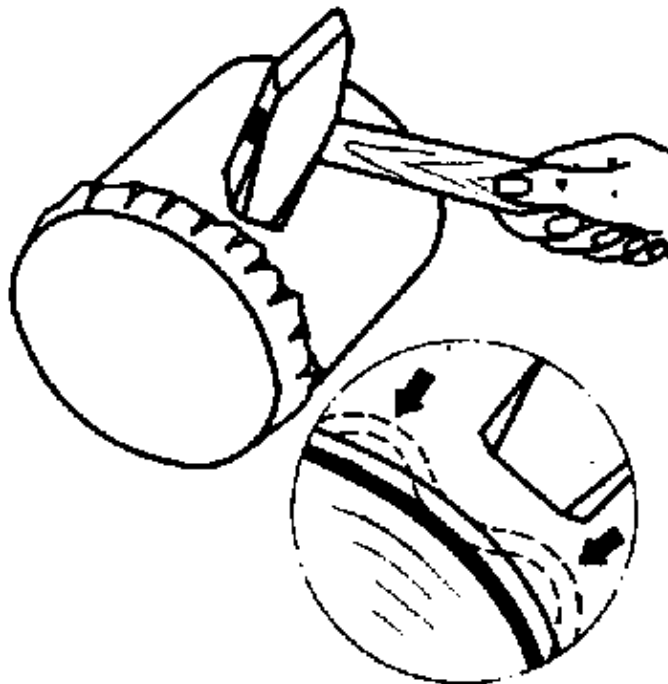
Finish-flanging: bulging in and smoothing of puckers
